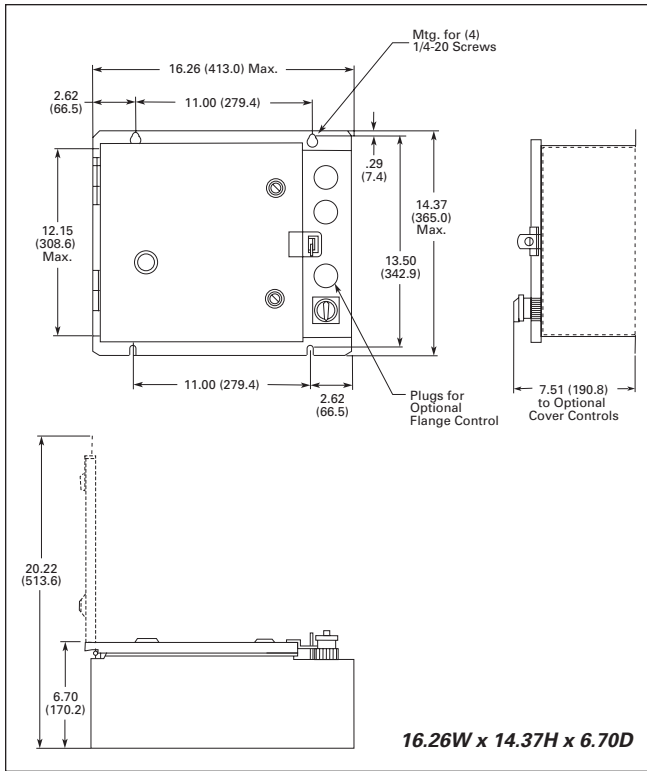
Box 7, Type 1 — Approximate Dimensions in Inches (mm)
